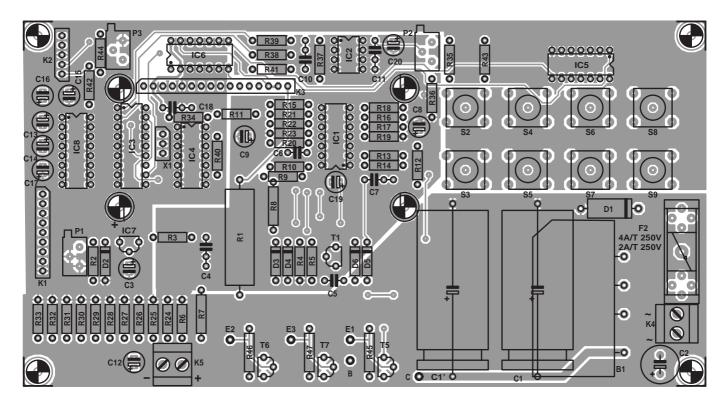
Component mounting plan of the double sided circuit board for the power supply.
